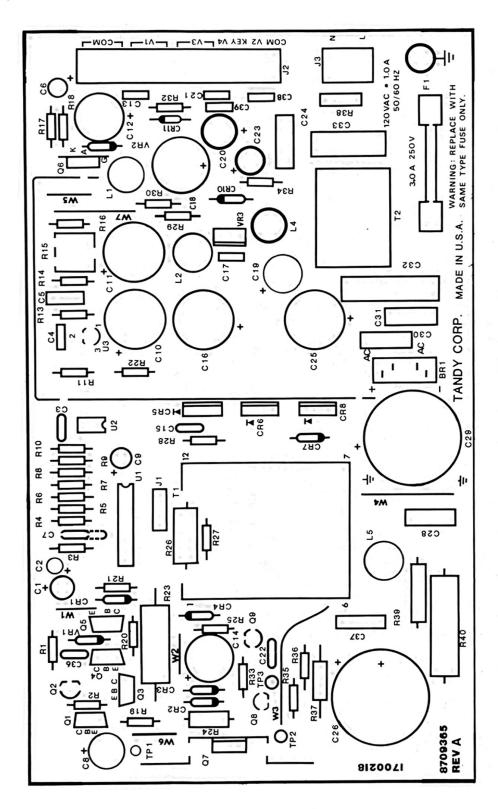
PRINTED CIRCUIT BOARD -- COMPONENT SIDE
